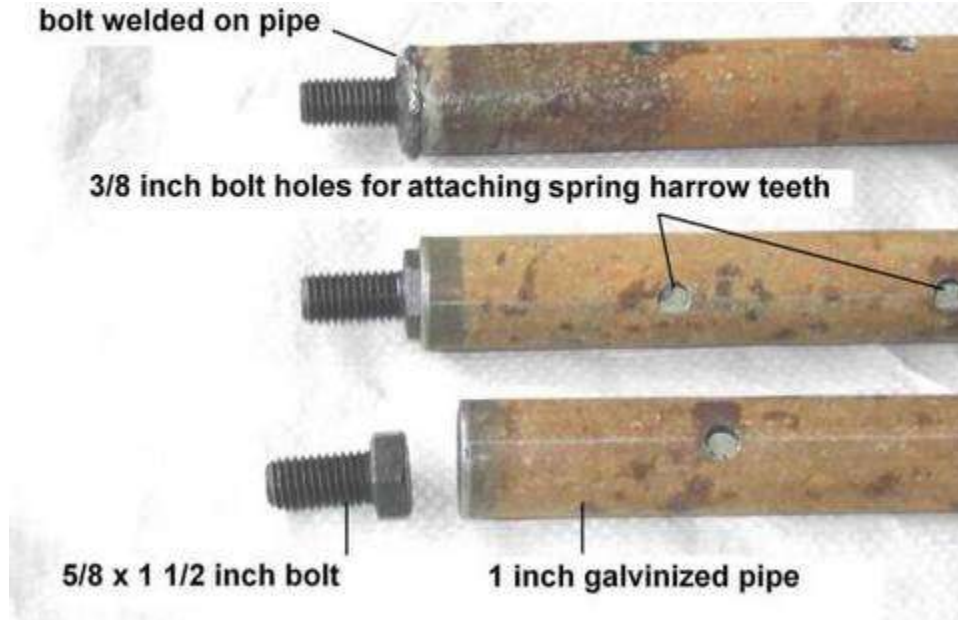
Cross bar with mounting bolt (5/8" x 1 1/2") welded on 1 inch galvanized pipe.
